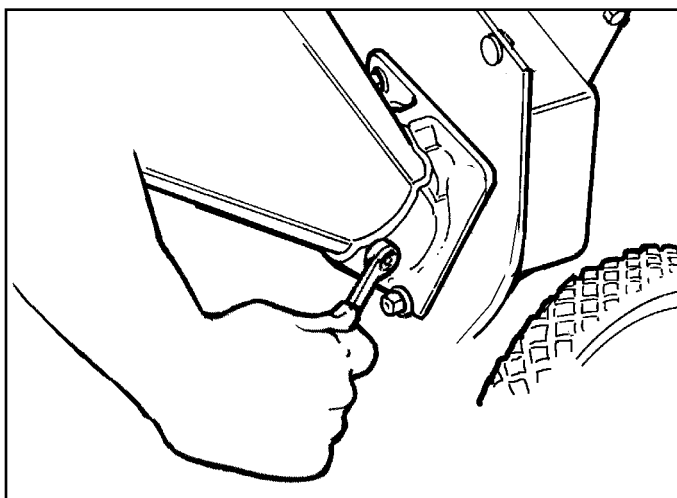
Removing Chipper Cone to Expose Chipping Knives.
